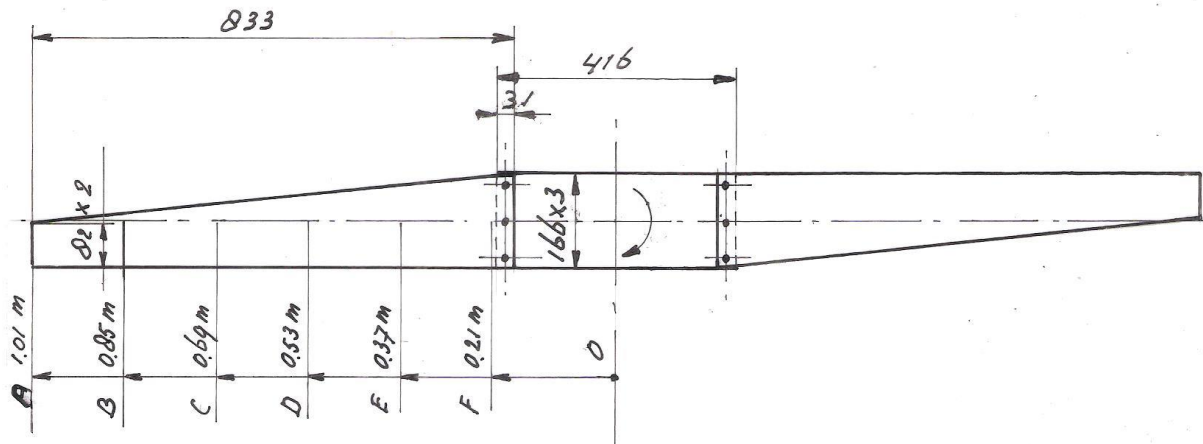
Sketch VIRYA-2.02 rotor, 2 mm stainless steel blades, $B = 2$, $\lambda_d = 6$
